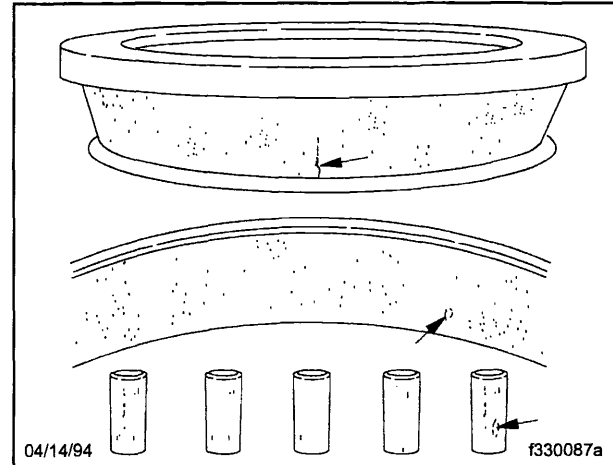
, Indentations, Cracks, or Breaks in Bearing Surfaces
